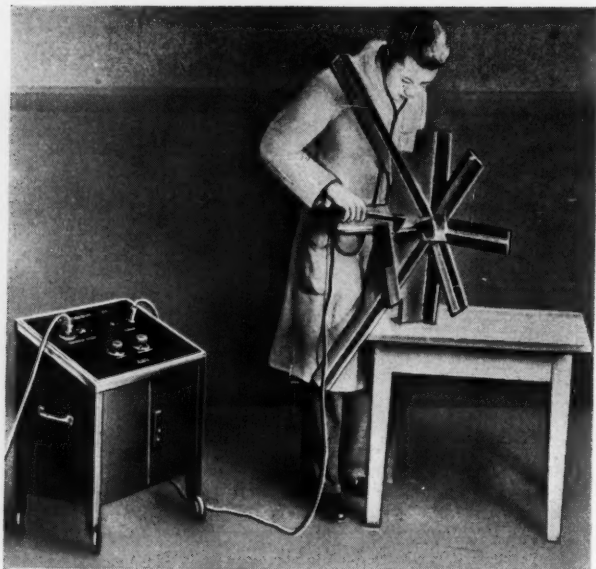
Using magnetic testing outfit to inspect welds in steel construction.
